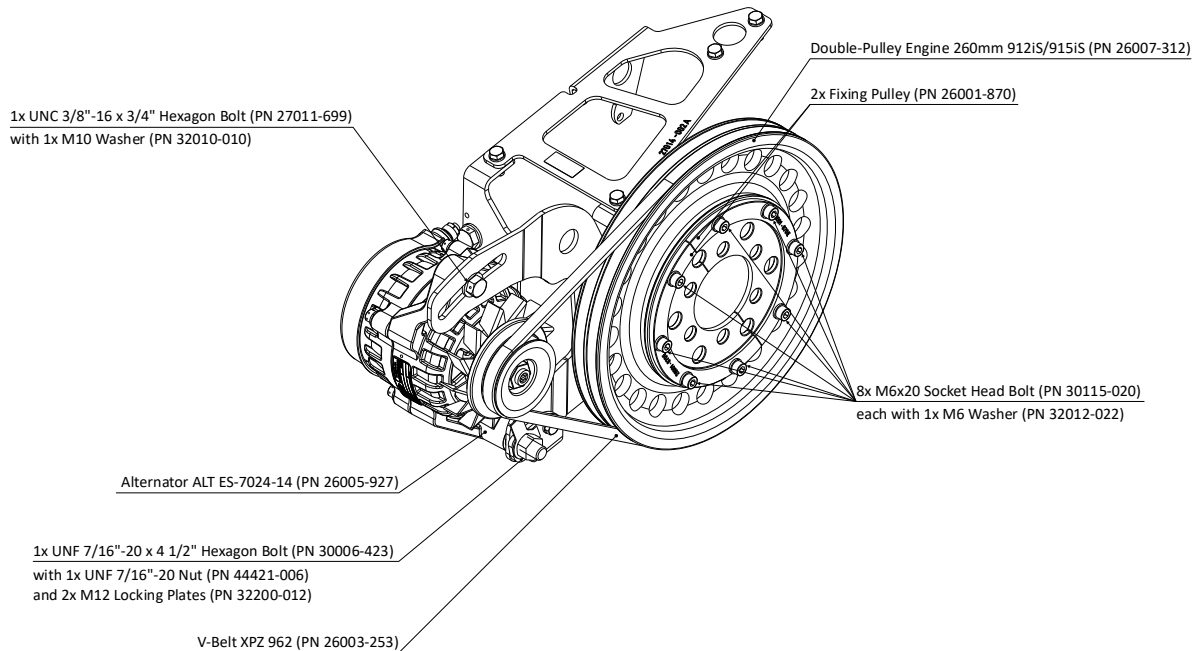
Isometric View Ext. Alternator Kit 70A Bank1 Rotax 915iS
